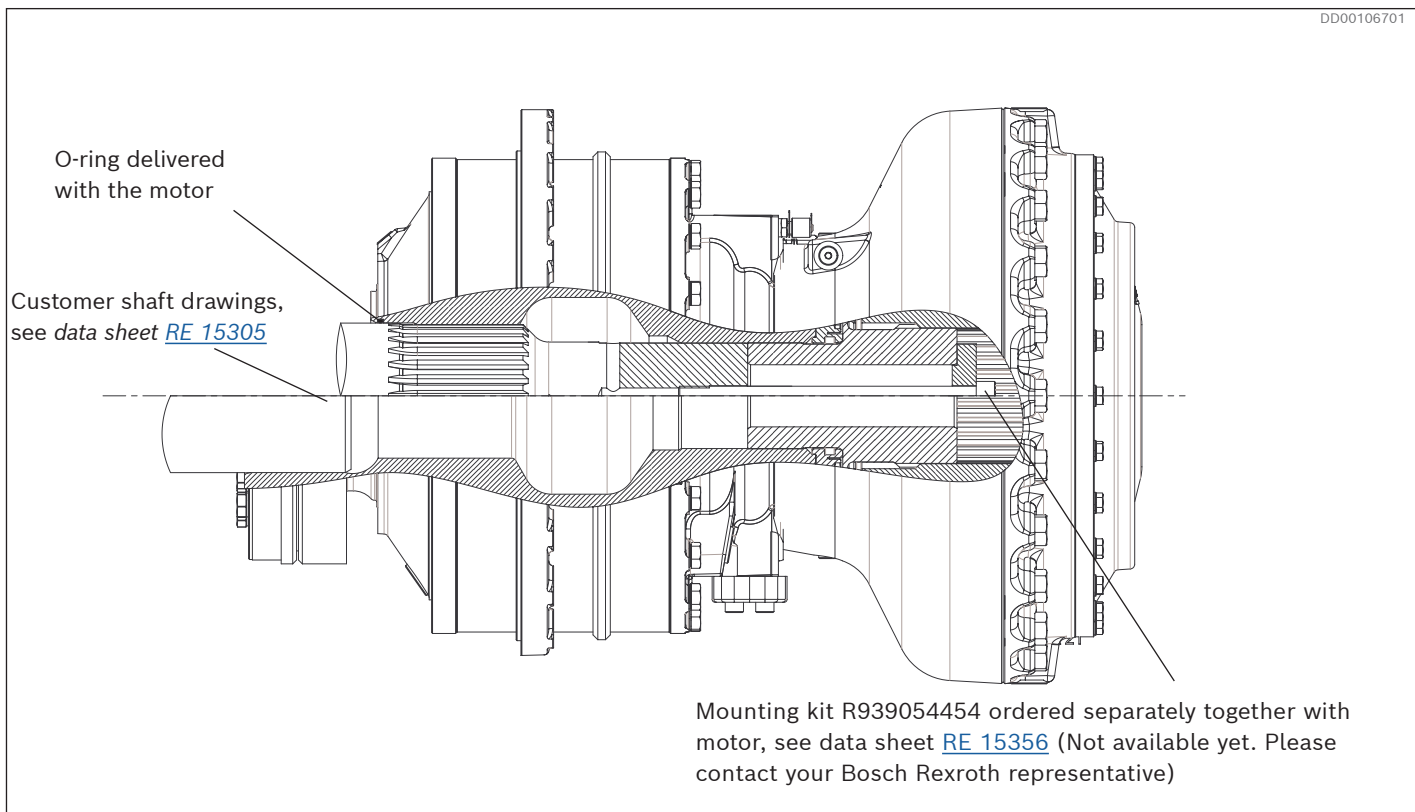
Example CA motor with spline or shrink disc coupling and tandem mounted MDA 14 brake on customer shaft
